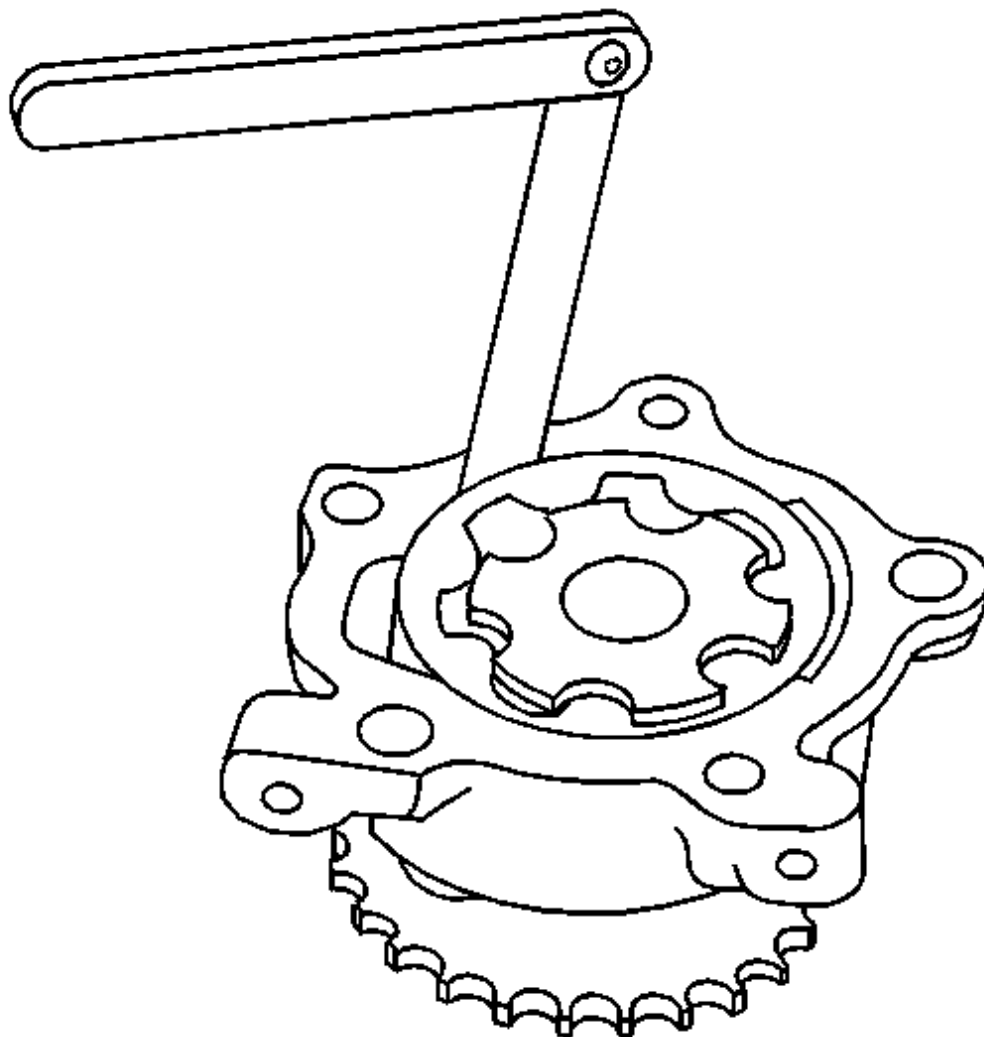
Measuring Radial Clearance Between Oil Pump Outer Gear & Oil Pump Body
